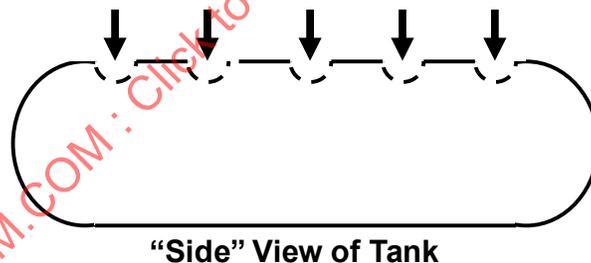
TEST ZONES ON THE CONTAINMENT VESSEL
